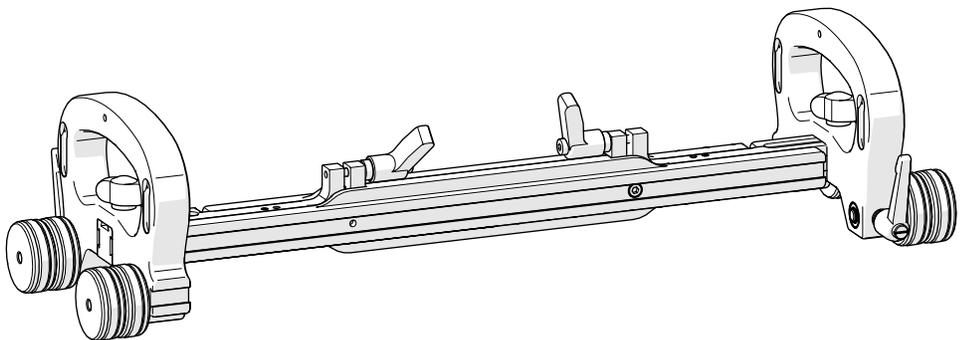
Wheel block with handle, wheels facing outward, handle flush with frame bar
